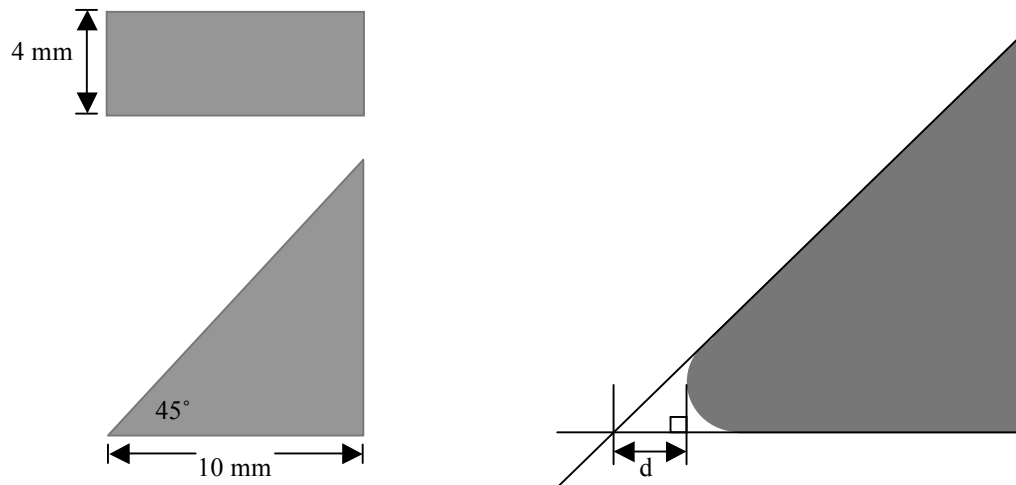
Shape and dimensions of the pattern used. Fig. 2. Definition of mold-filling index (μm).
